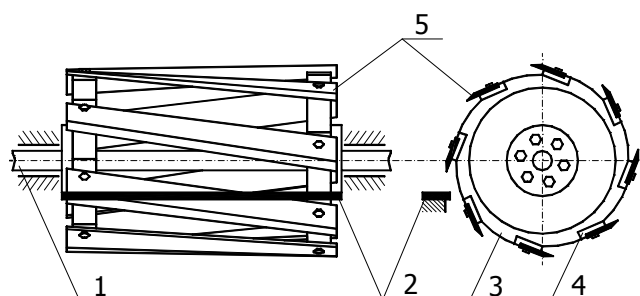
Cutting drum of a straw cutter [5]: 1- cutting drum's shaft, 2 – counter cutting edge called shear plate, 3 – cutting drum's shield, 4 – cutter holder, 5 – cutting knife
